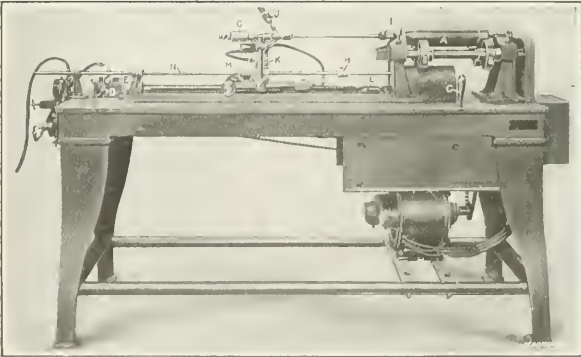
De Vilbiss Spraying Machine for coating Interior of High-explosive Shells
